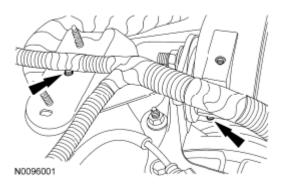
Locating Negative Battery Cable Pin-Type Retainers Courtesy of FORD MOTOR CO.
